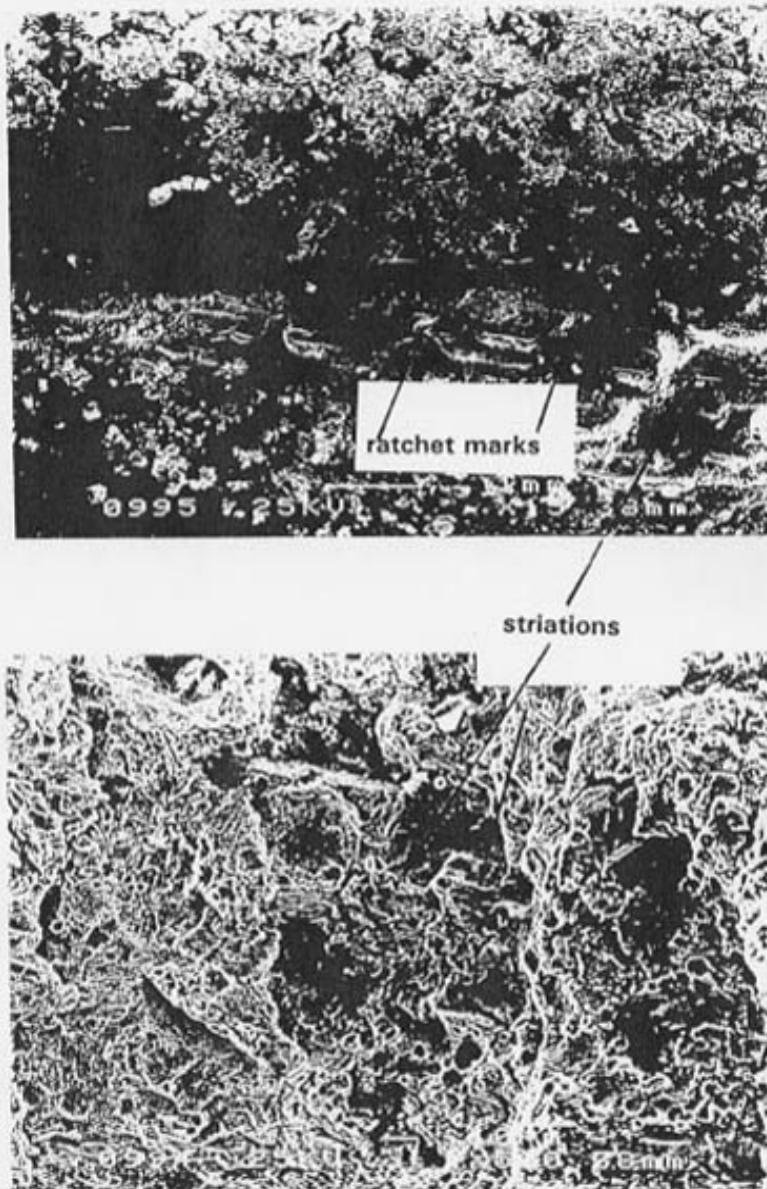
Fatigue striations on cylinder mounting weld crack from fig.35
